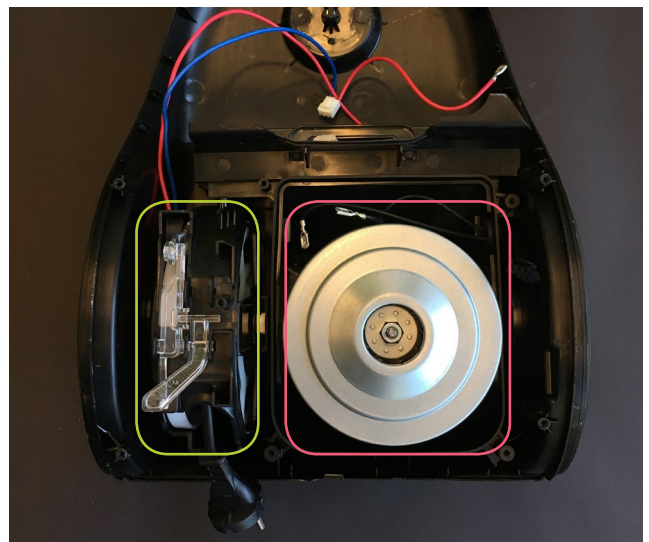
, Dependent disassembly of motor and cord-winder in Rowenta X-Trem
